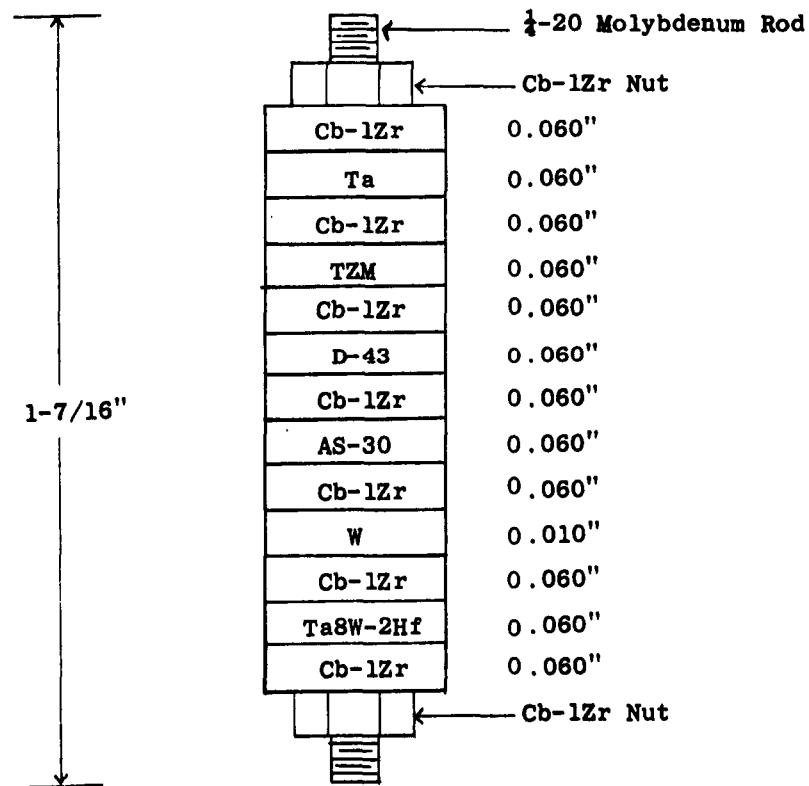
Schematic of Diffusion Bonding Test Assembly Illustrating the Location of the Test Materials.
